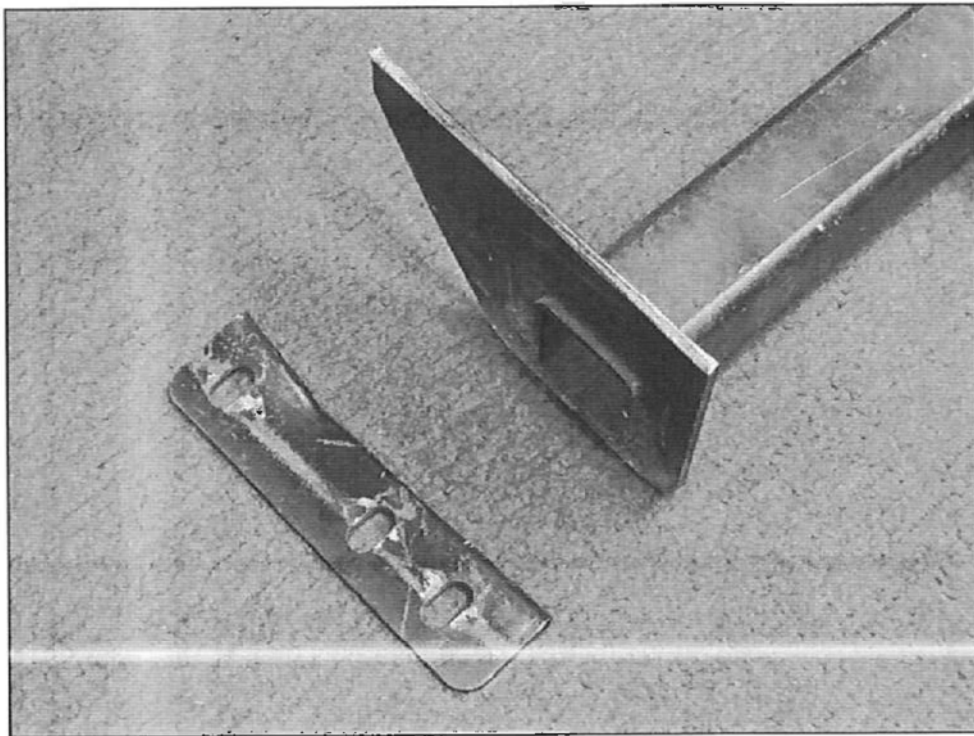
Left Side – breakage followed the radius to the mounting – the fractured end was relatively straight
